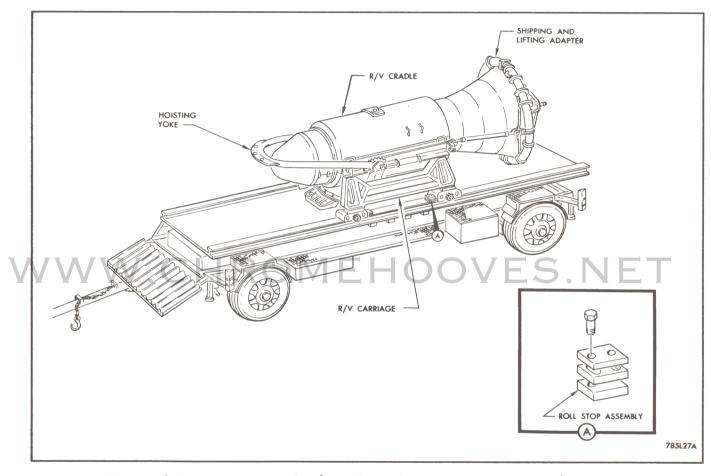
Position of R/V and Handling Equipment on R/V Trailer
